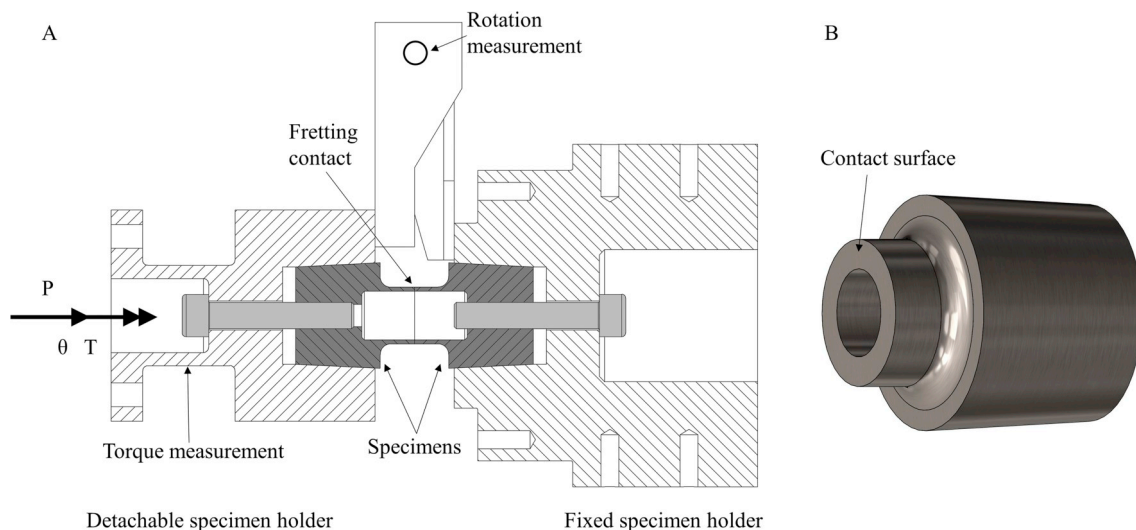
Cross-section of specimens and holders (A) and test specimen (B).
